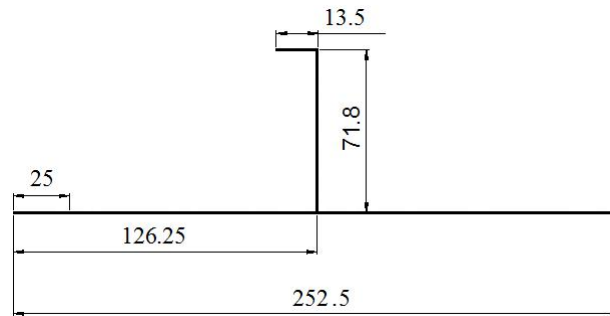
Cross section of the L-shaped stiffener (dimensions in mm).
